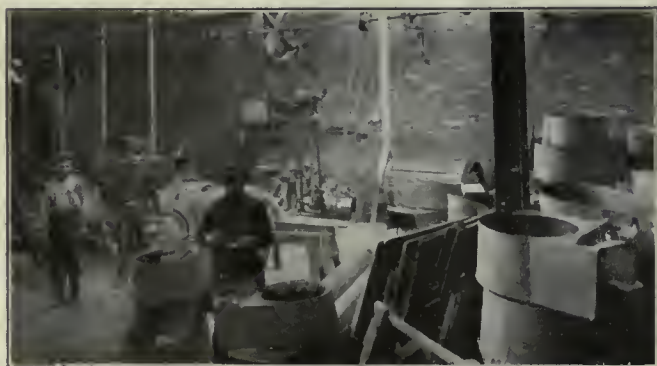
CLEANING ROOM, SHOWING TUMBLERS.
